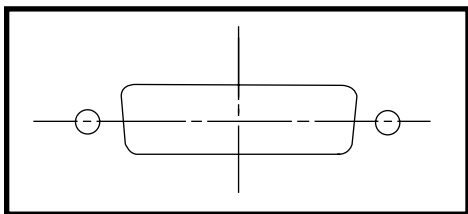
This is the DB25 connector with all of the unwanted lines and dimensions removed.
